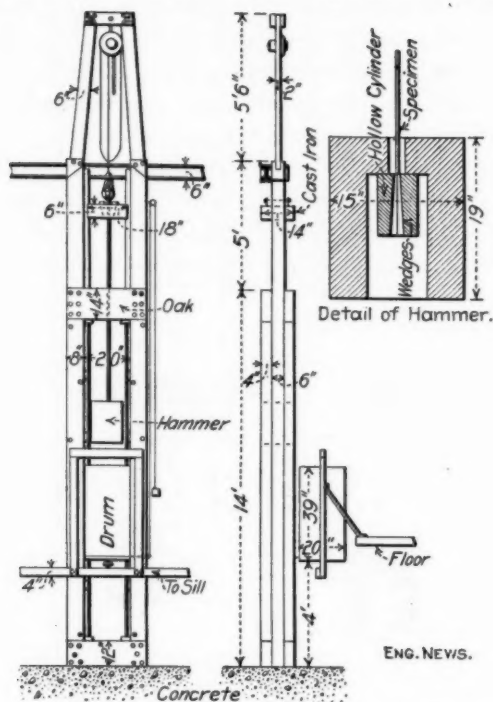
Temporary Tensile-Impact Testing-Machine; Sketch at Right Shows Method of Fastening Hammer to Lower End of Test Specimen.
